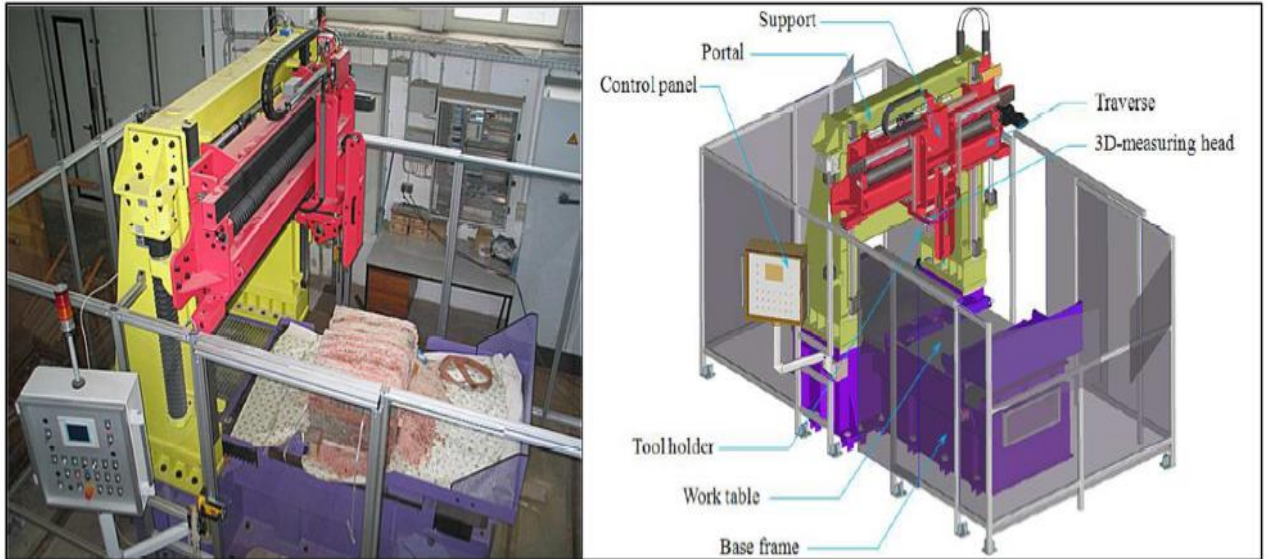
9: Photo (left) and scheme (right) of the large scale cutting machine [29]
